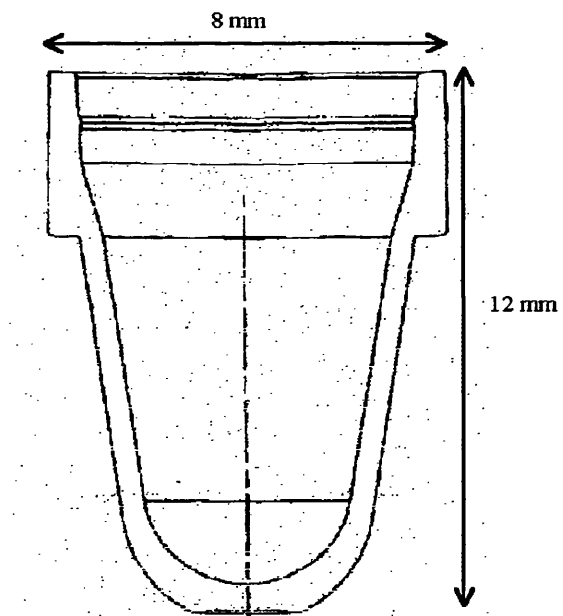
Geometrical shape and dimensions of the well.
